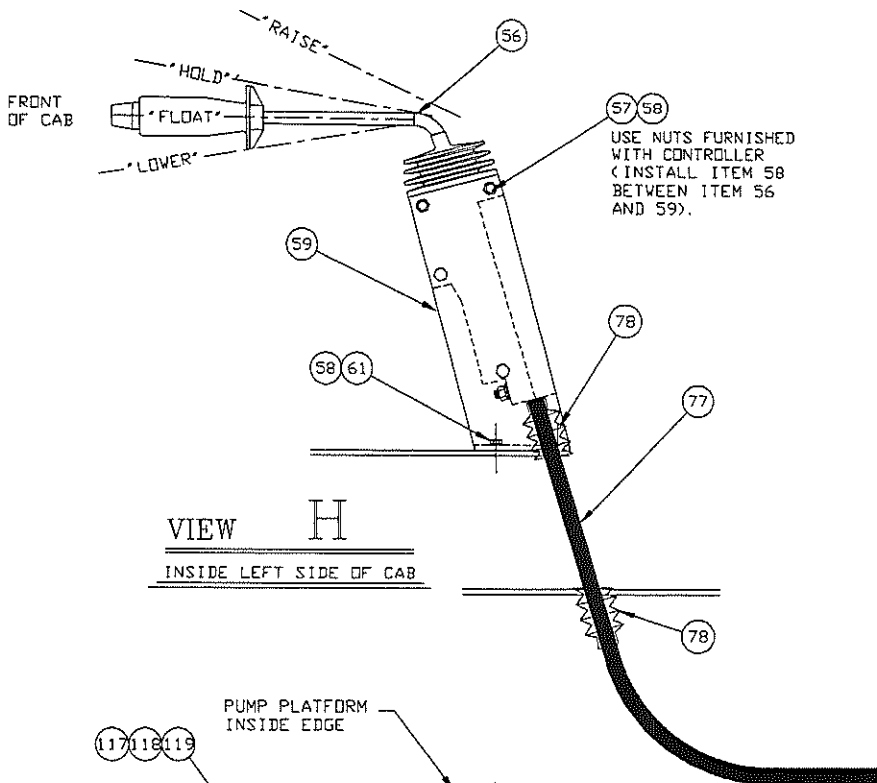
DUMP SYSTEM ASSEMBLY (A85183 SHEET 3 OF 6)
